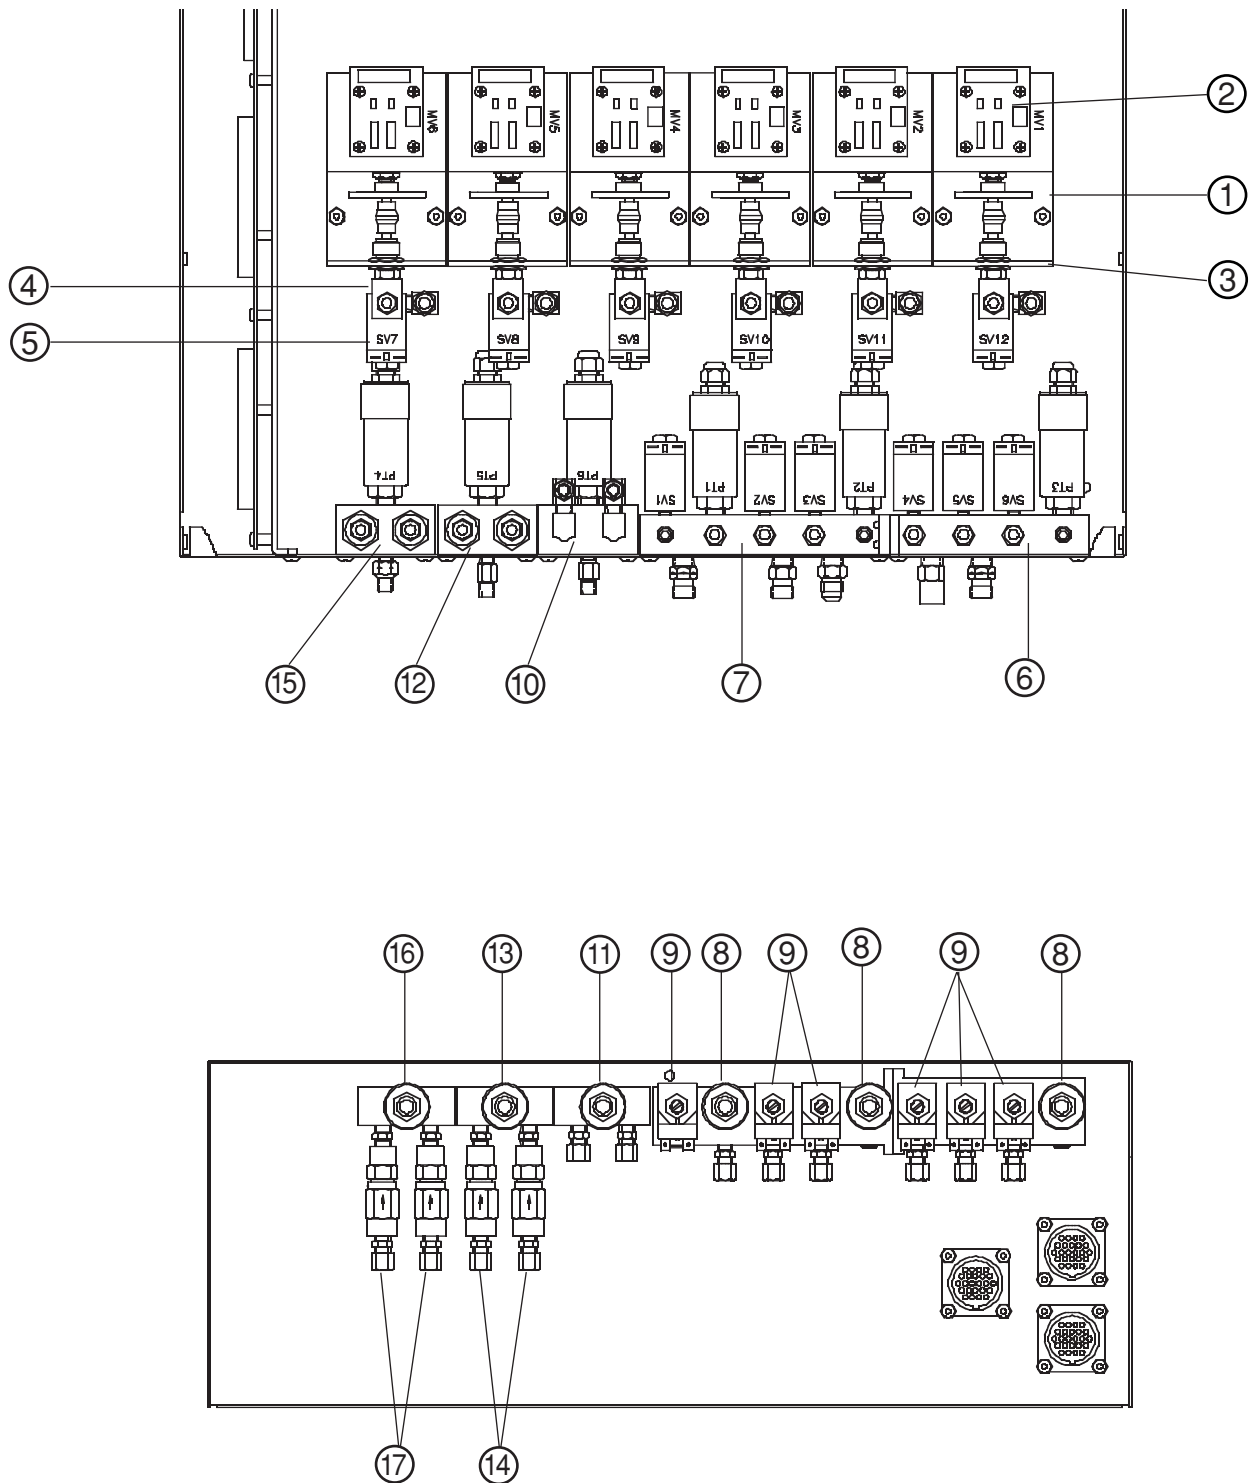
Manifold SA, Motor-Valve SA & Rear
